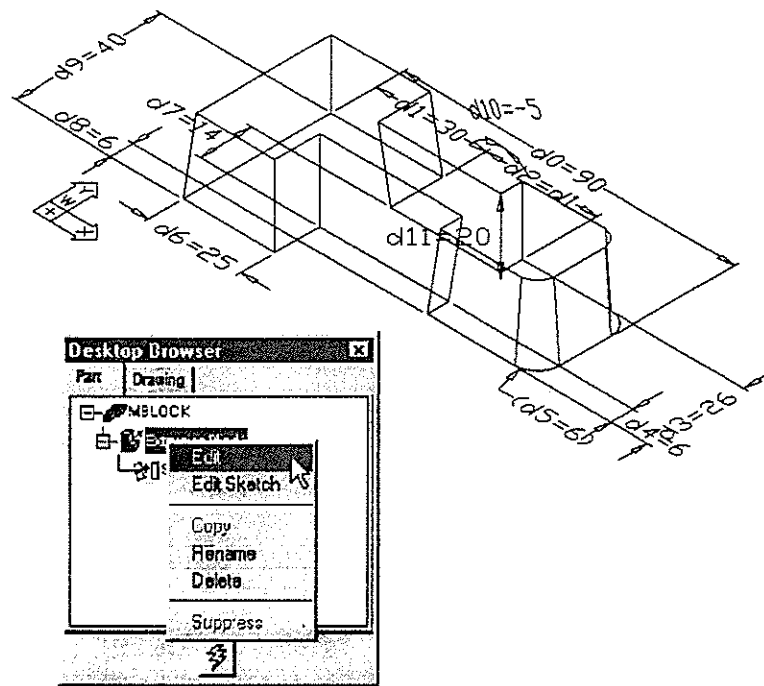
Using the Desktop Browser shortcut to edit the extrude solid
